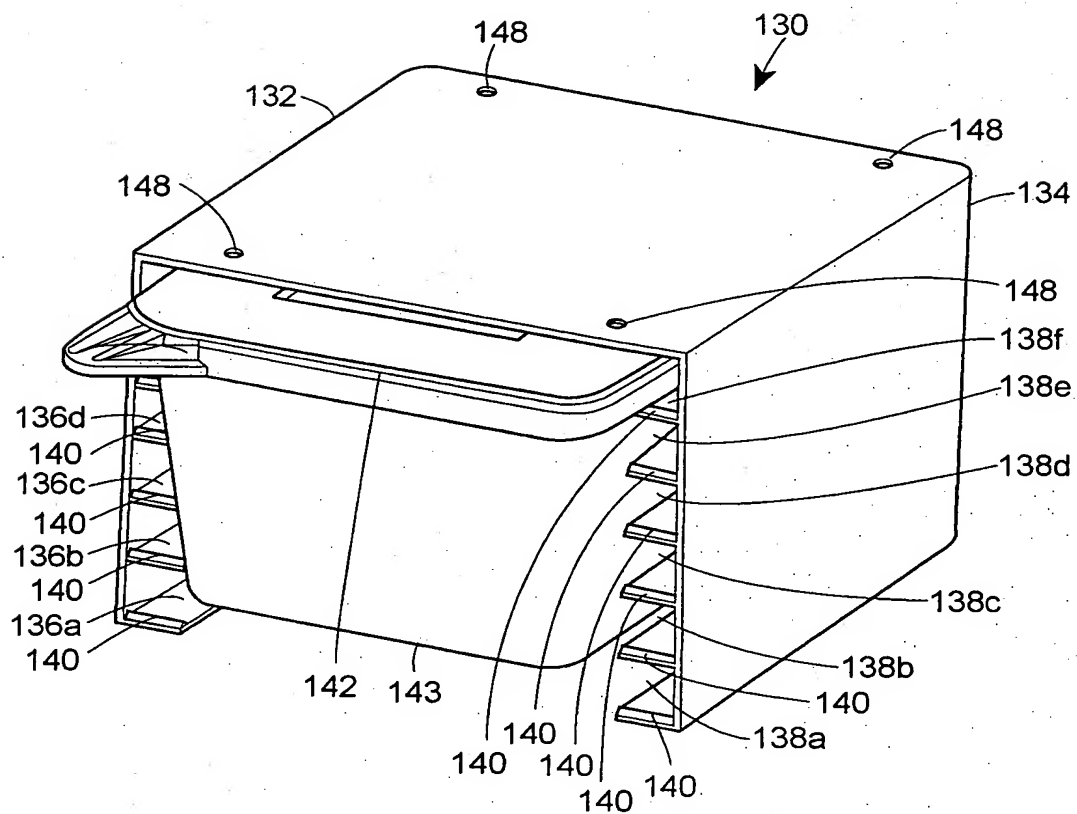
is a perspective view of a multi-layered assembly 130. The assembly includes a top layer 132 and a stack of lower layers 138a through 138f. Each layer 138a-f has a top surface 140 and a bottom surface 142. The layers are secured by fasteners 148. A side view of the stack shows the alternating layers 140 and 142.
